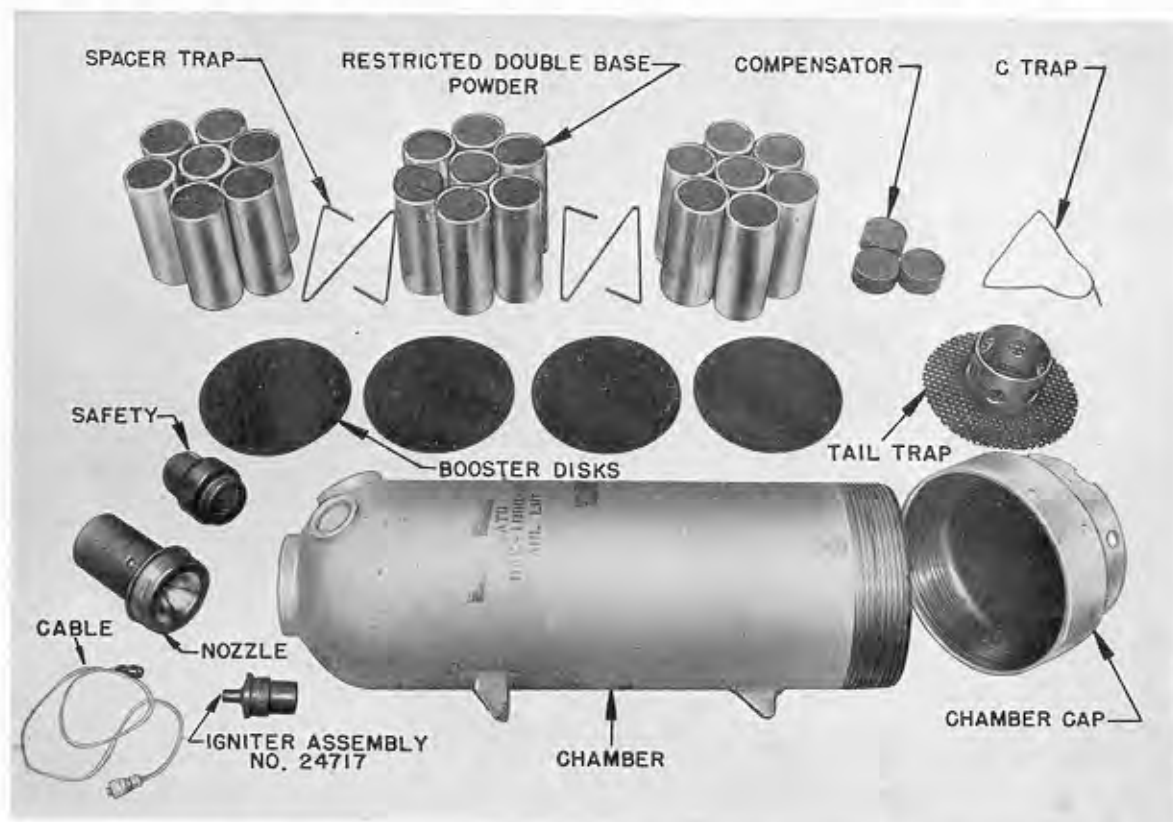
Photograph of disassembled JATO unit showing propellant charge and support.
